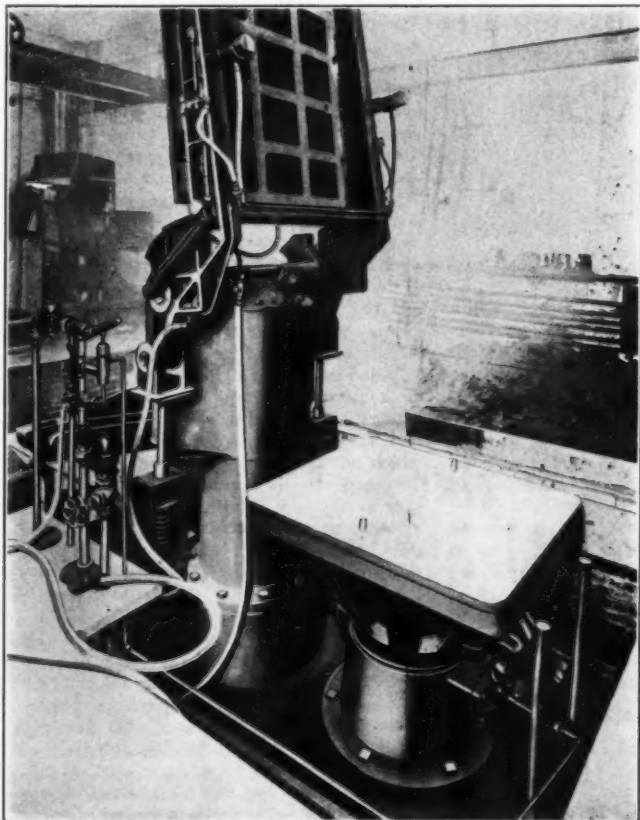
Power Roll-over Machine Combined with Jarring Machine.
